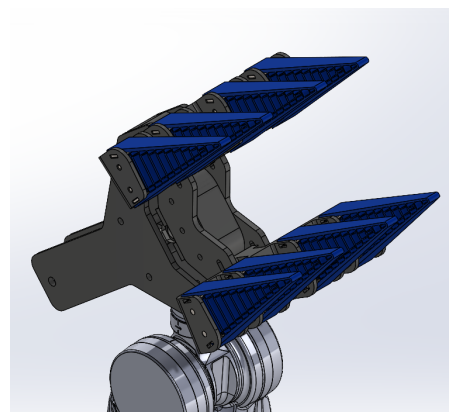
The final prototype is shown here mounted to the TX2-60's flange. It is equipped with four pairs of Festo DHAS-120 Adaptive Gripper Fingers, designed to optimize the contact area during grasping operations. The visual is a screenshot of a 3D model created in SolidWorks.
